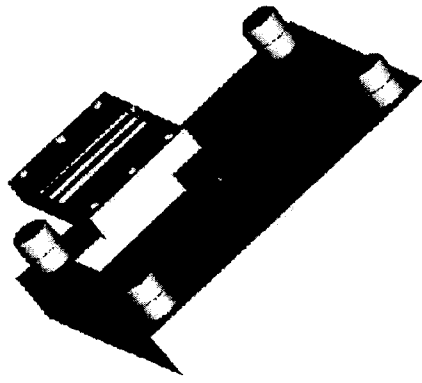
Schematic drawing of cassette mold for injection molding of specimens
